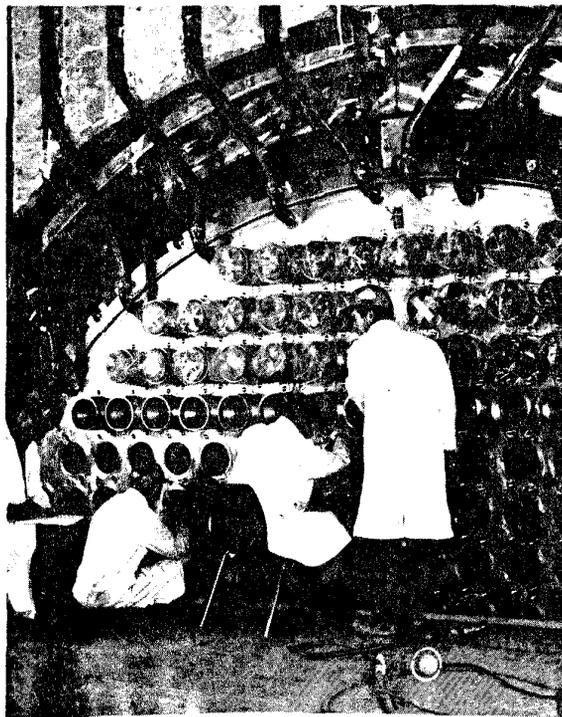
Calandria Tube Sheets Showing Bellows Seal
